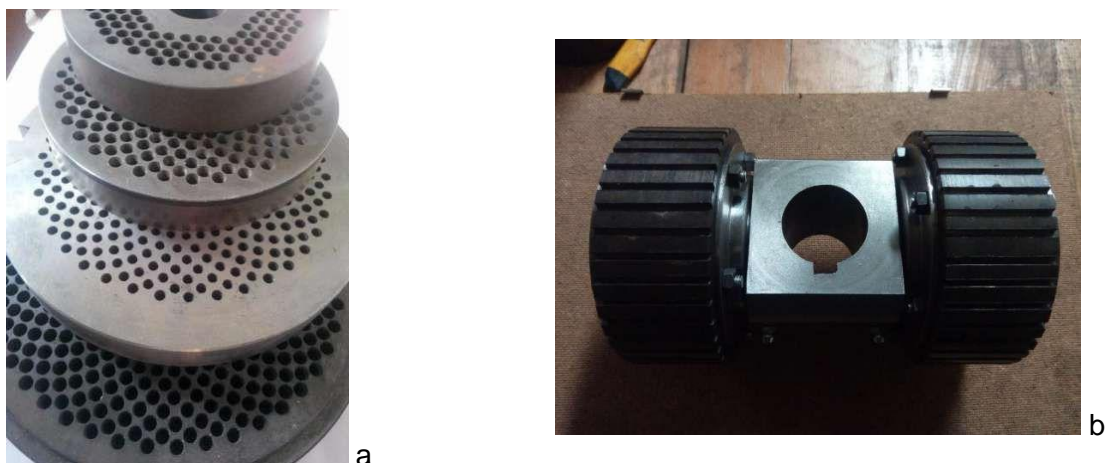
Pelletizing press: a-mold; b-axle with presser rollers
